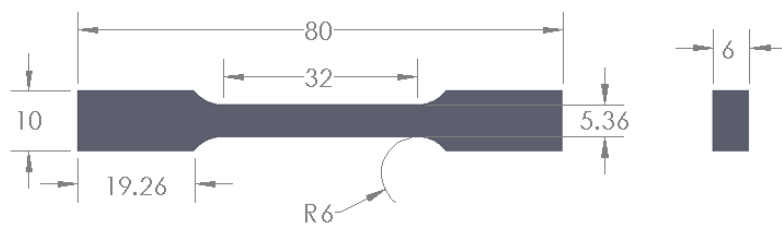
Nominal dimensions of fabricated E8/E8M tension specimens.
